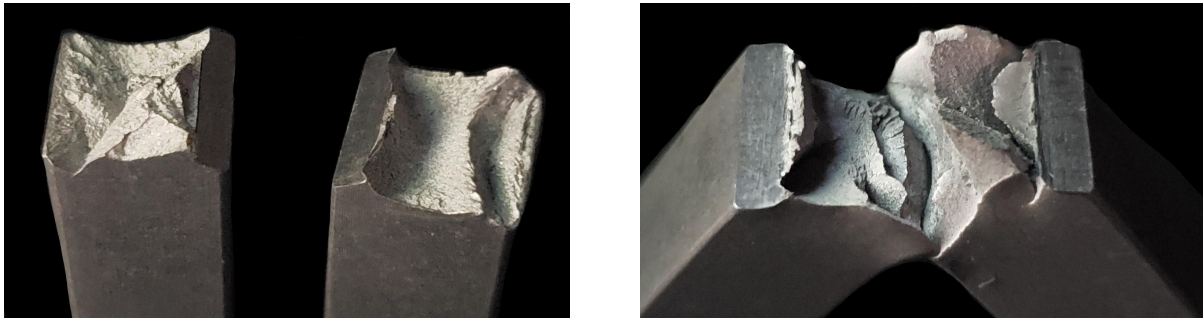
Specimen A fracture surface under two separate conditions. The image on the left shows the brittle fracture of material A (-200 °C). This fracture is characterized by sharp edges and the absence of plastic deformation. The image on the right shows plastic deformation (7 °C), seen by the reduction in the diameter of the specimen.
